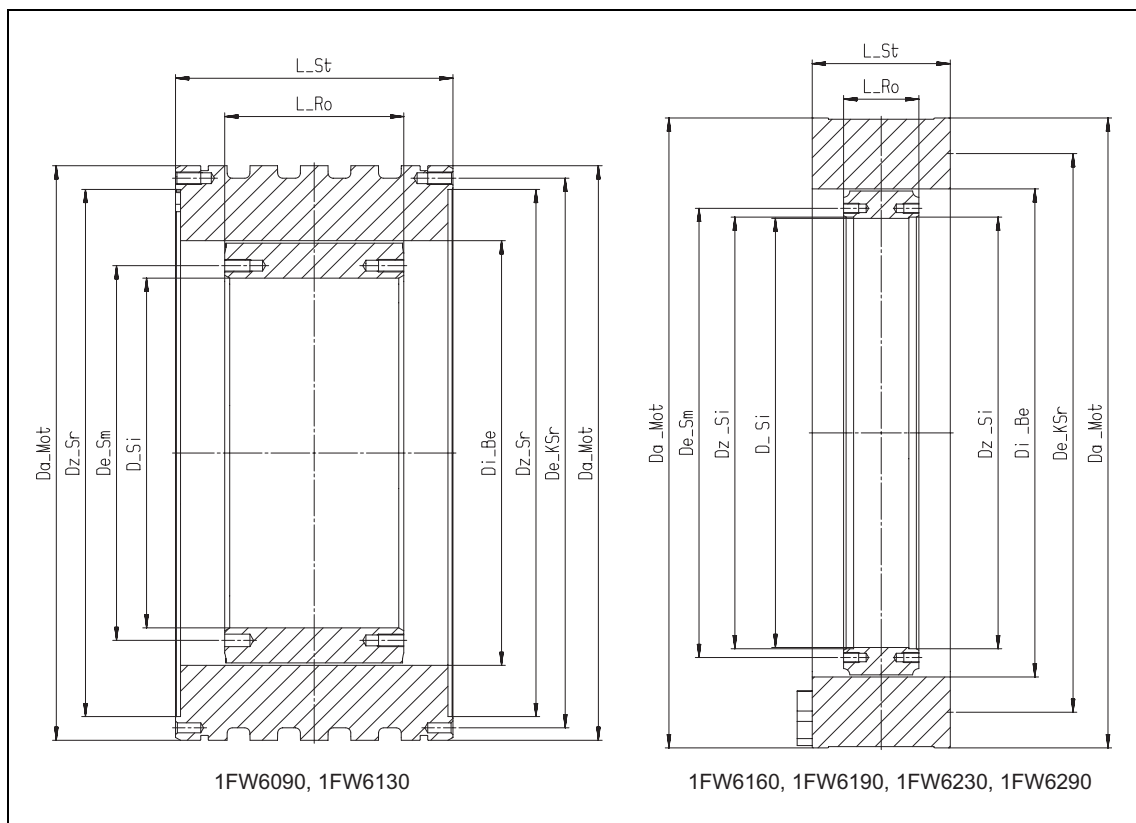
Geometrical data of the 1FW6 built-in torque motors
